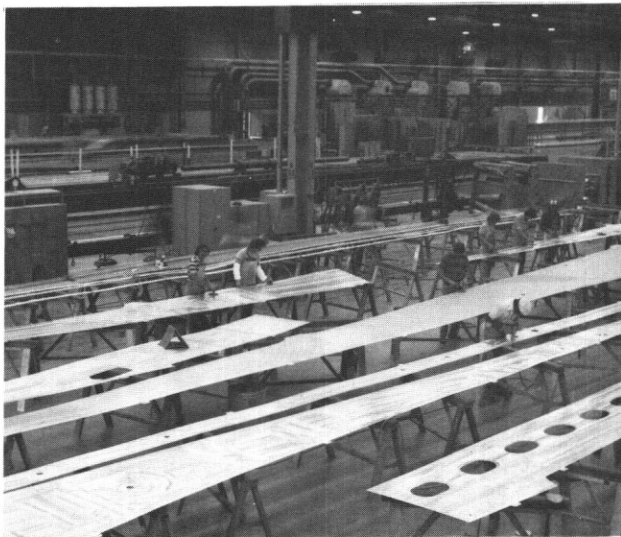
Blending Cutter Mismatch Marks On Wing Skins
